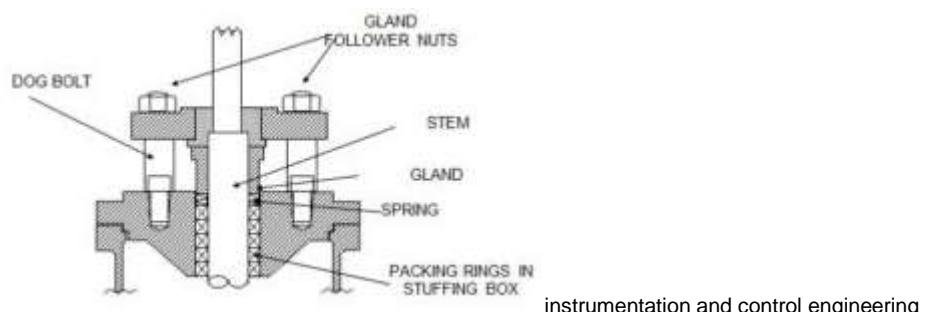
SHOWING THE TYPICAL VALVE STEM PACKING LAYOUT.
